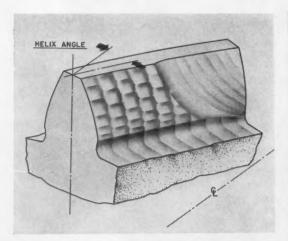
This diagram indicates the kind of feed marks produced when finishing the flank of a helical gear tooth.
